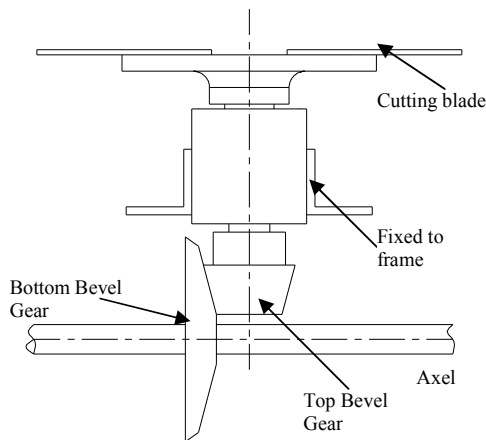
Cutting blade arrangement. Here bottom bevel gear is not shown in this figure.
